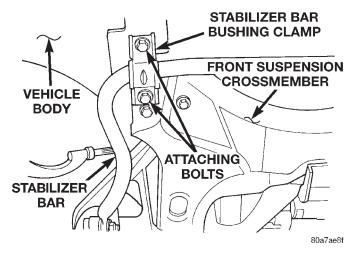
Stabilizer Bar Bushing Clamp Attaching
